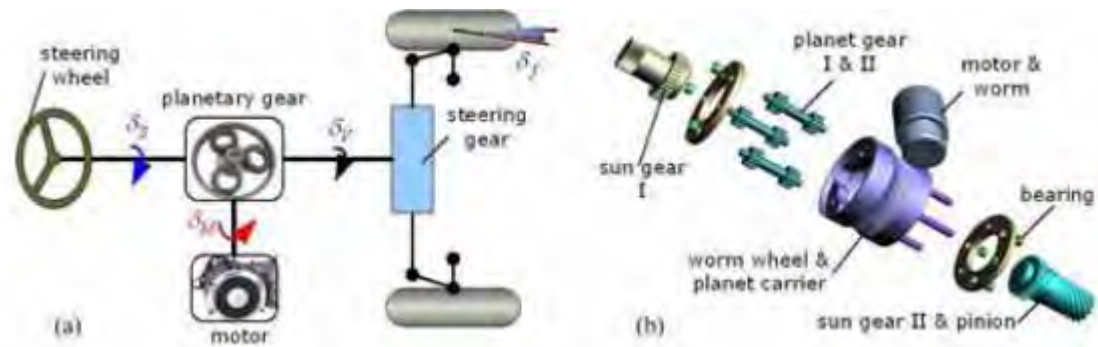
(a) Schematic view of AFS system; (b) 3D-model of planetary gear set and electric motor [1].
